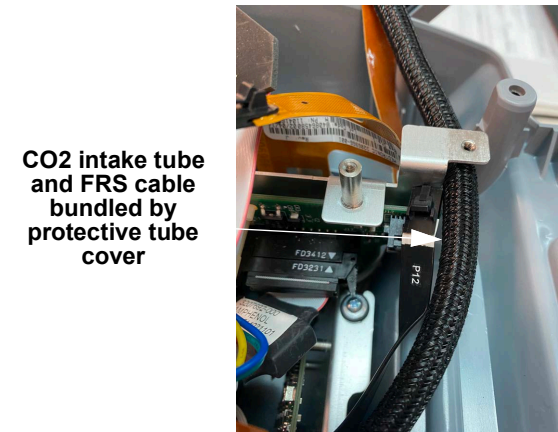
CO2 Intake Tube and FRS Cable Bundle
